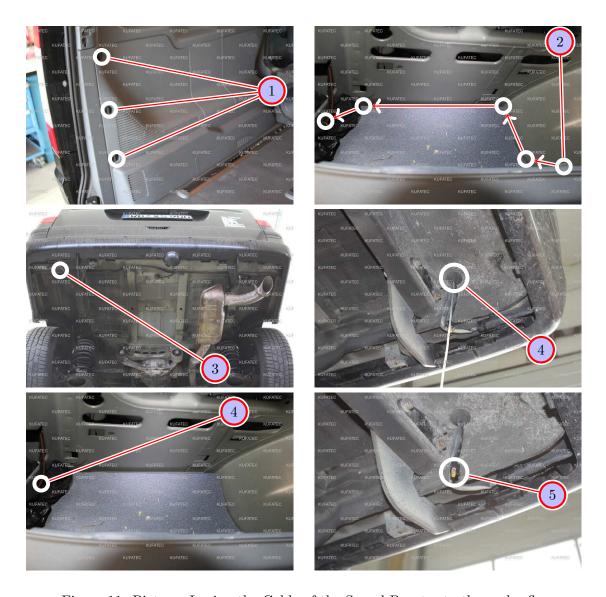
Pictures Laying the Cable of the Sound Booster to the under-floor
